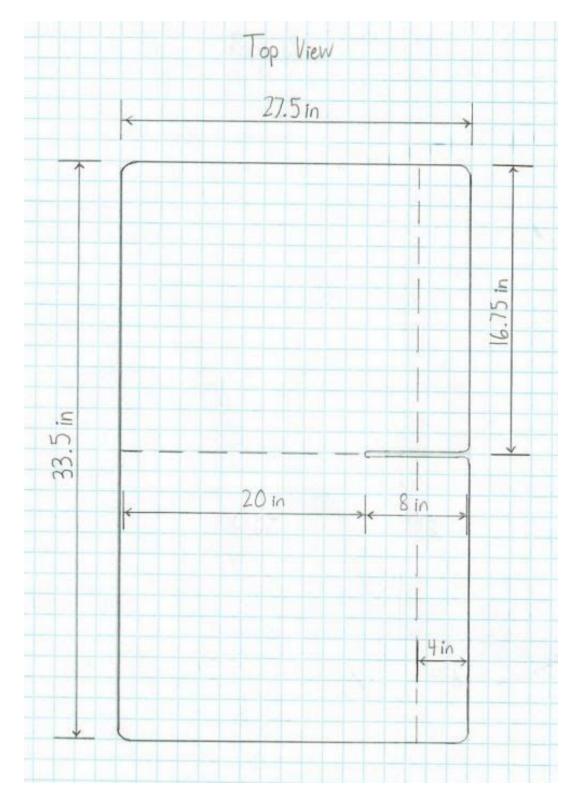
The sketch and dimensions of the top view of the ramp.
